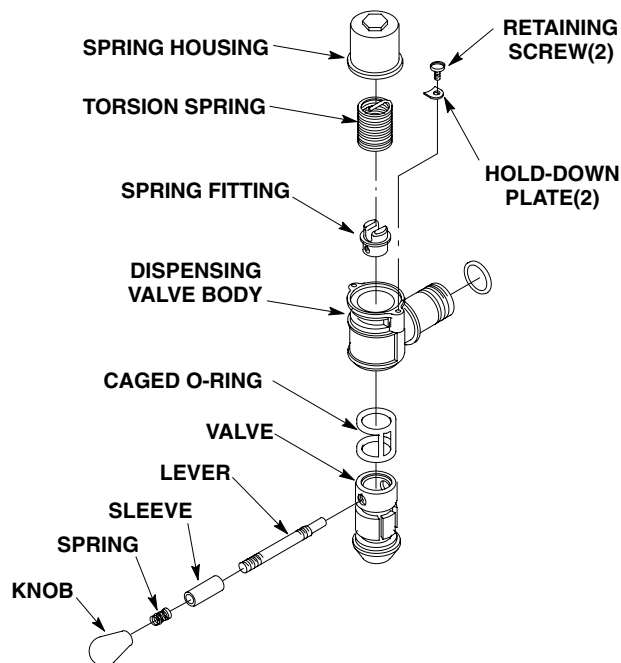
SELF-CLOSING DISPENSING VALVE
